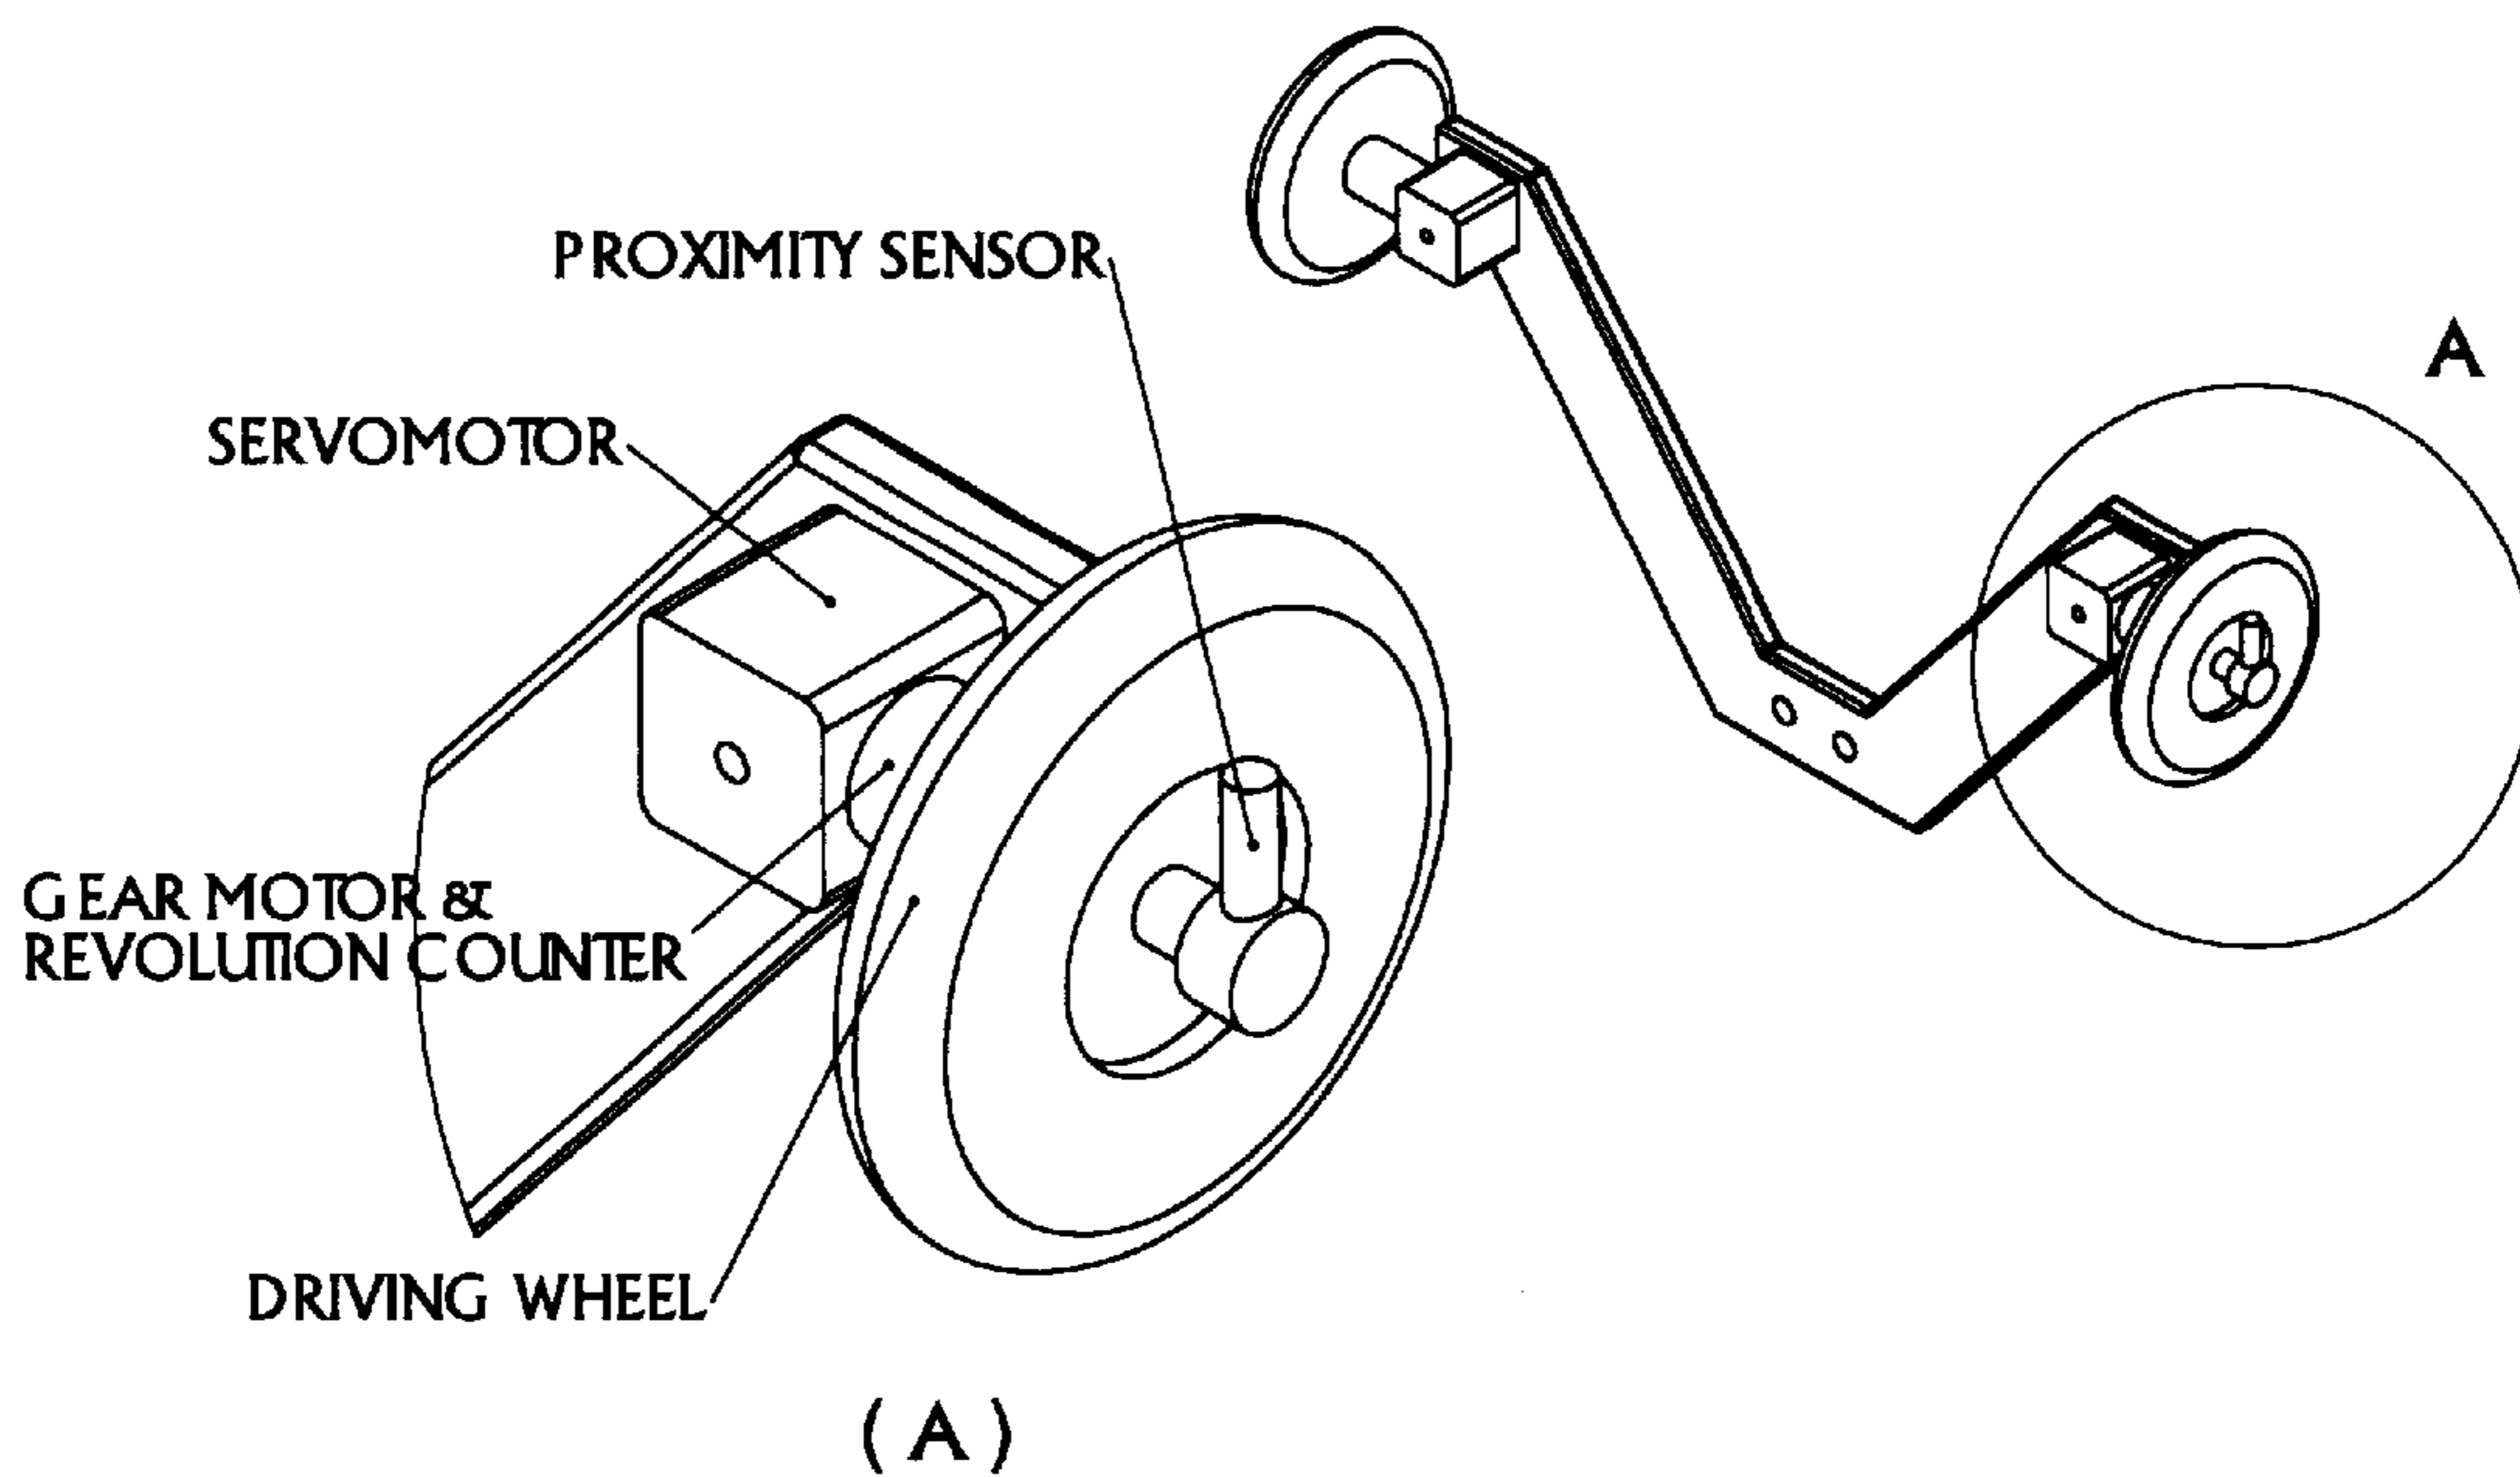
DETAIL OF THE WHEEL ASSEMBLY
